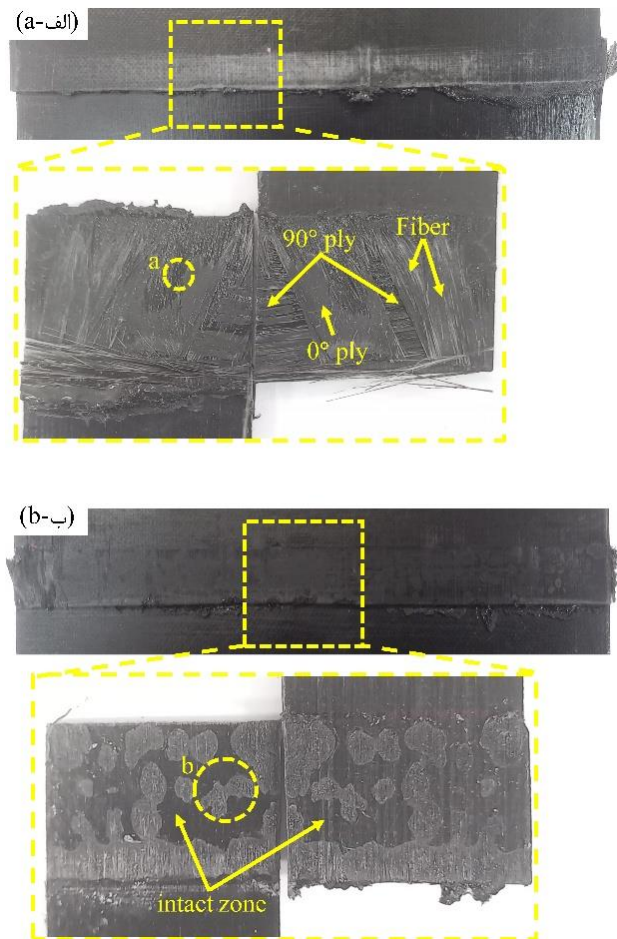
Weld line and a sample of its fracture surface. (a): Test number three, power 900W, pressure 2bar and speed 10mm/s. (b): Test number four power 900W, pressure 2bar and speed 30mm/sec.
